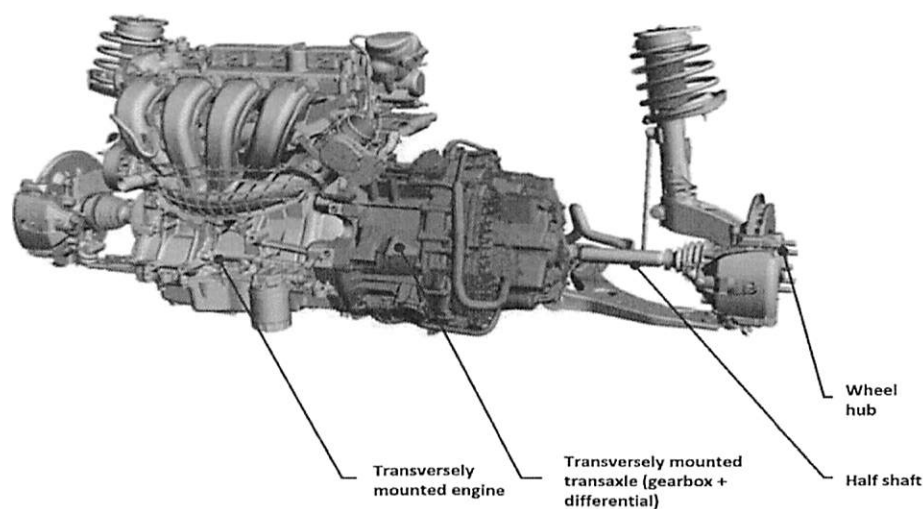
Transmission (blue) and front-wheel drive drivetrain.
